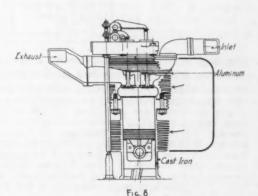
Design for Cast-Iron Cylinder-Barrel and Detachable Aluminum-Head. Initial Tests Showed That Low Output Was Due to Power Consumption by the Fan, Low Compression-Ratio and Overheating of Intake Gases
